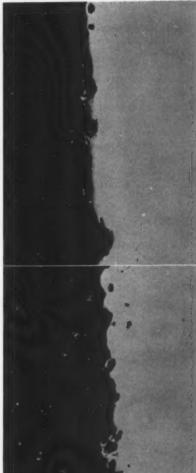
(left) — Casting edge on casting poured in 6 per cent resin-magnesia shell mold. 13 \times .
